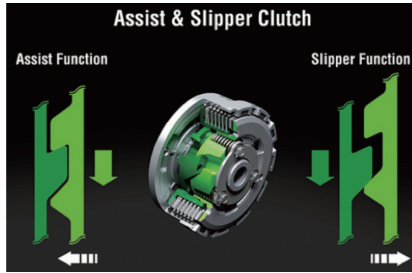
Assist & Slipper Clutch (Ninja 250)
